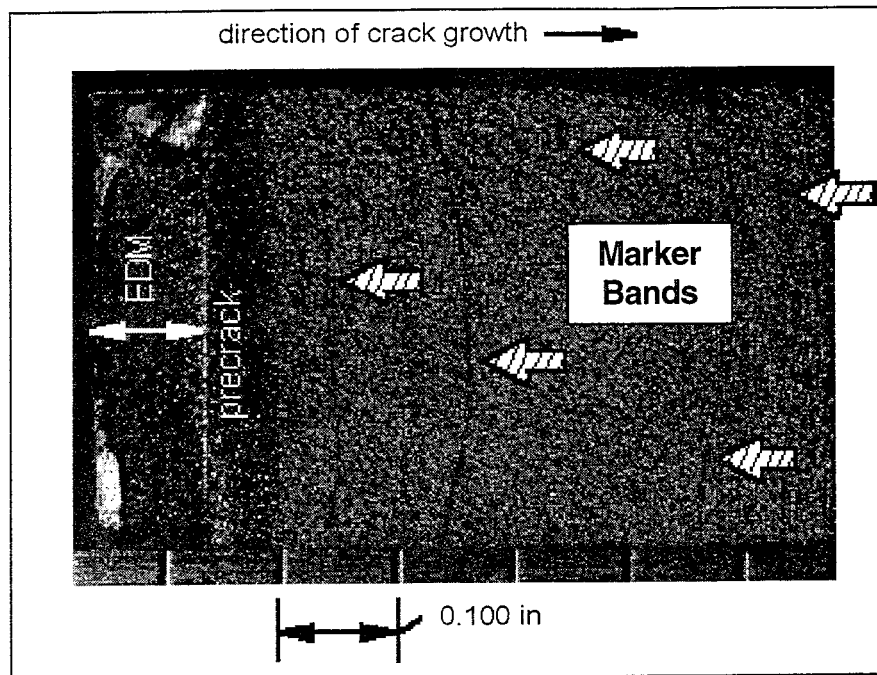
Marker Bands on Coupon Fracture Surface
